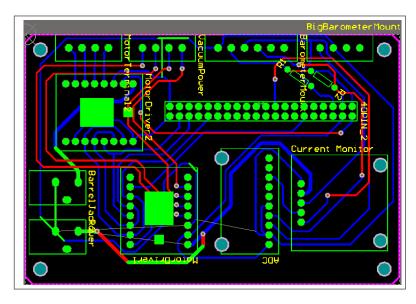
Circuit Board Layout (Authors'work.) The green layer is the component outlines and their pin holes. The blue layer is the bottom layer. The red layer is the top layer.
